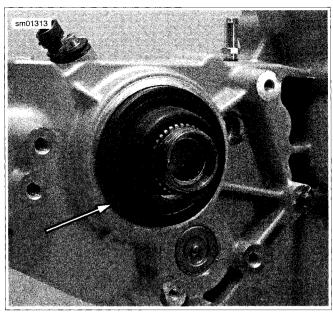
Install Main Drive Gear Seal (typical, XL model shown)
